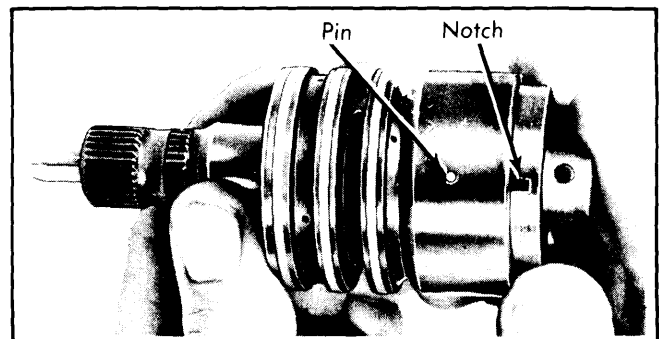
Aligning Pin and Notch for Input (Stub) Shaft
